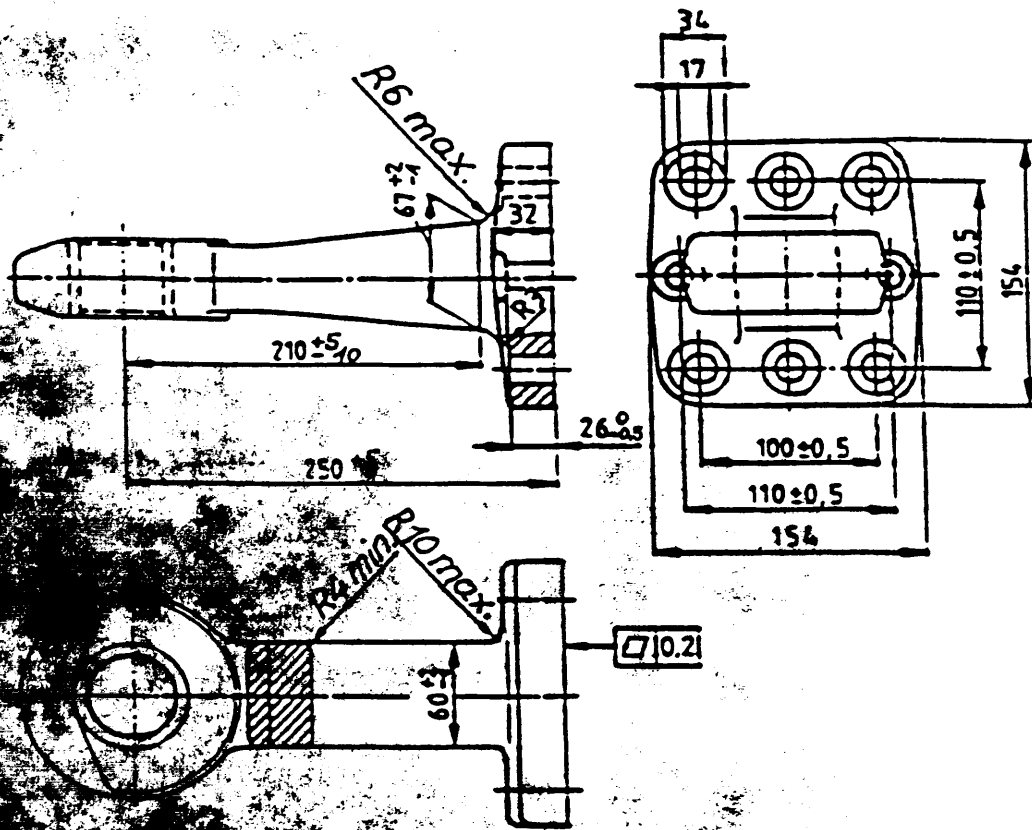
Dimensions of Class D50-C1 drawbar eyes (see Fig. 9 for missing dimensions)
